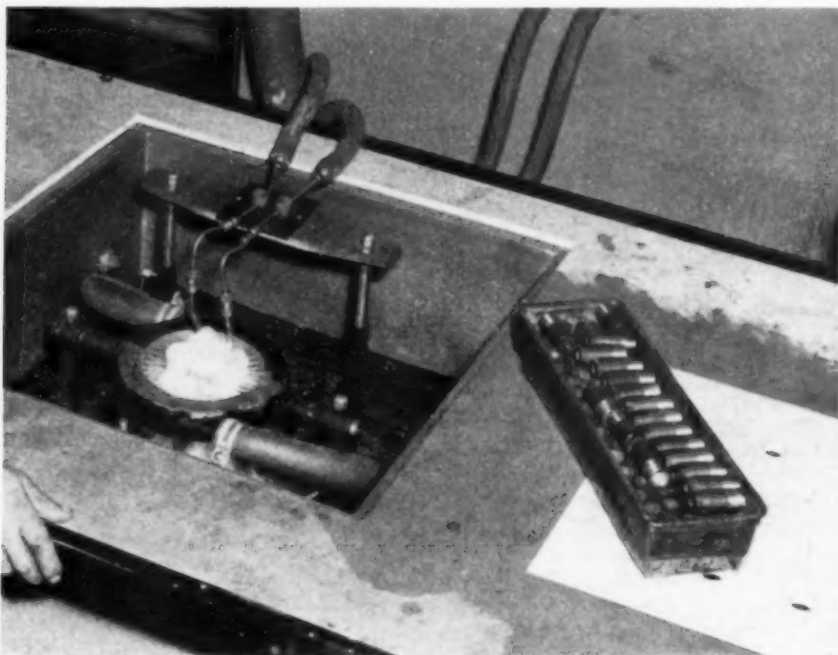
Hardening Drill Bushings to Close Limits; Bushing Is Rotated Within Heating Coil. (Courtesy Acme Industrial Co.)
